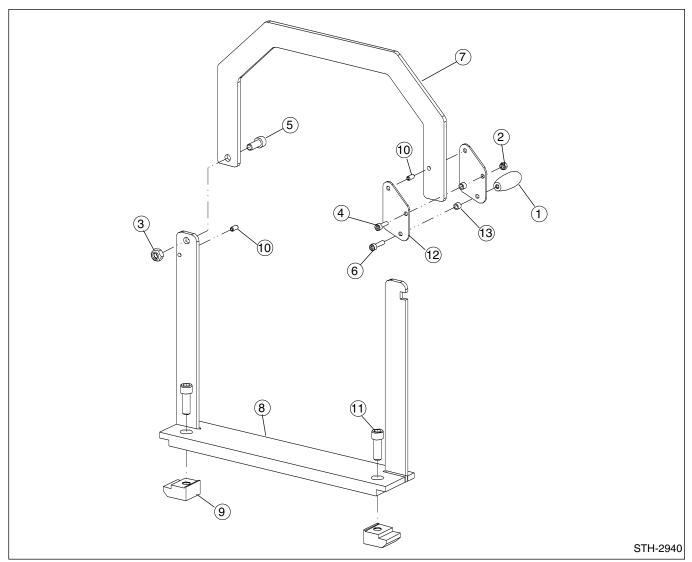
FIGURE J - DRIVESHAFT SAFETY CAGE ASSEMBLY
